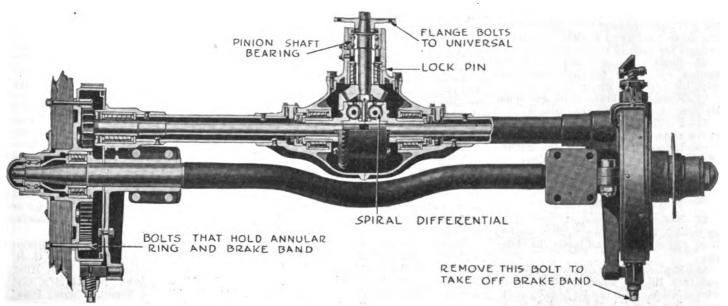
The left half of the figure shows how the rear wheel, pinions and annular gear are arranged. At the right is seen one of the bolts that hold the axle-shaft casings to the dead axle
